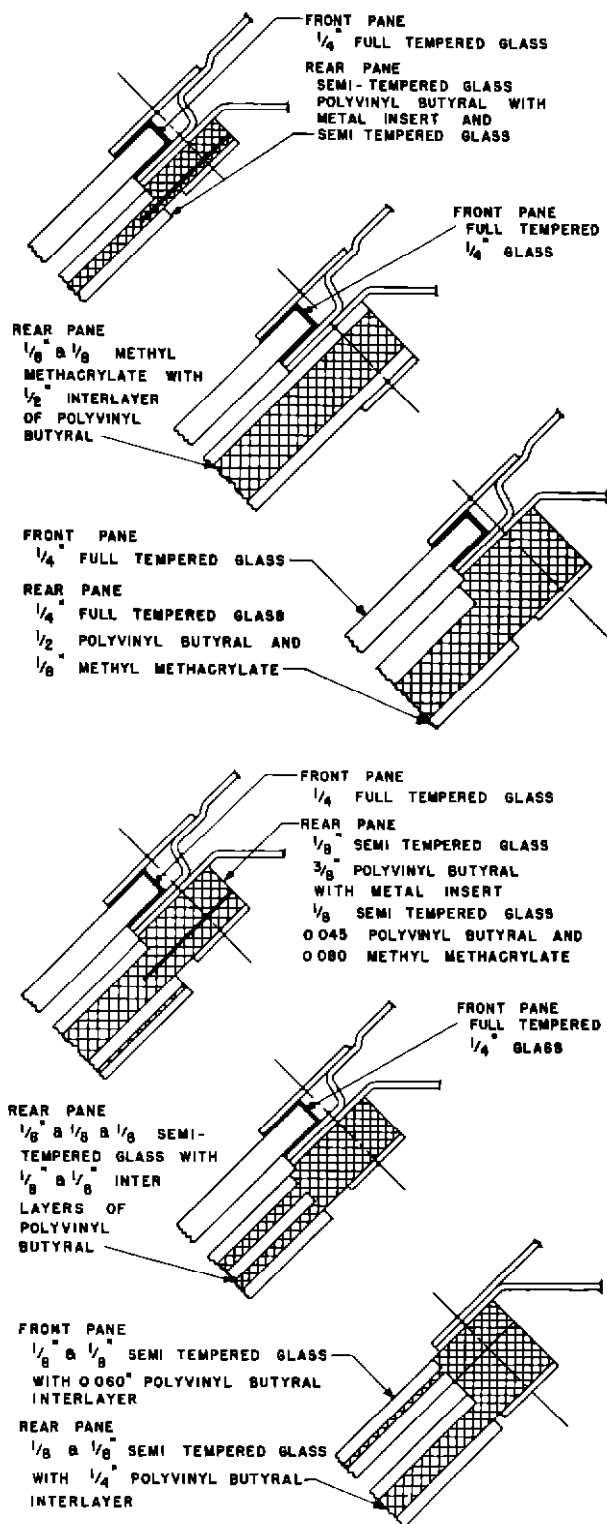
Type IV Windshield Panel Double Pane With Flexible Bolted Edge Rear Pane Type of Mounting
